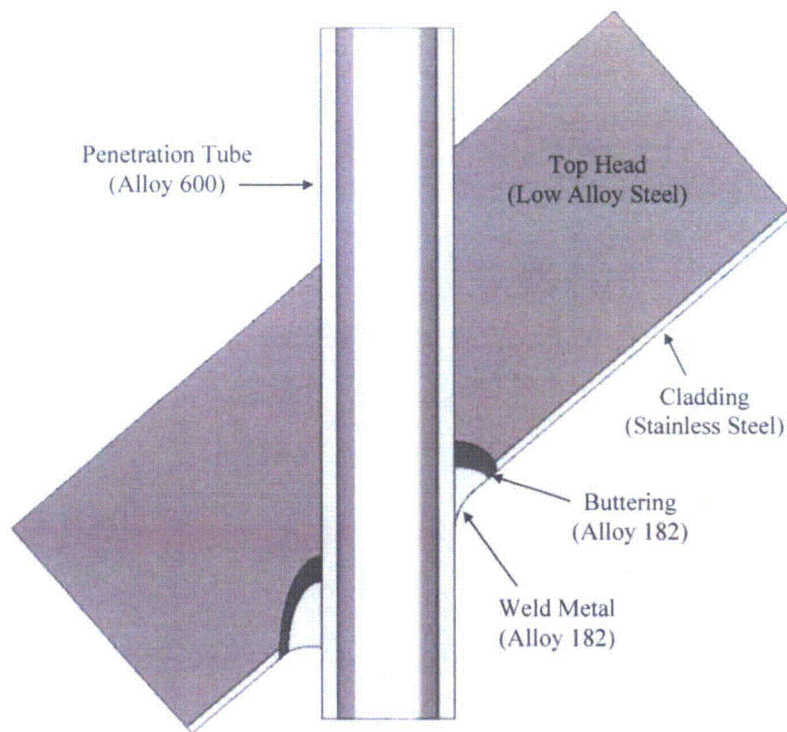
Control Rod Drive Mechanism Penetration-Nozzle Assembly
